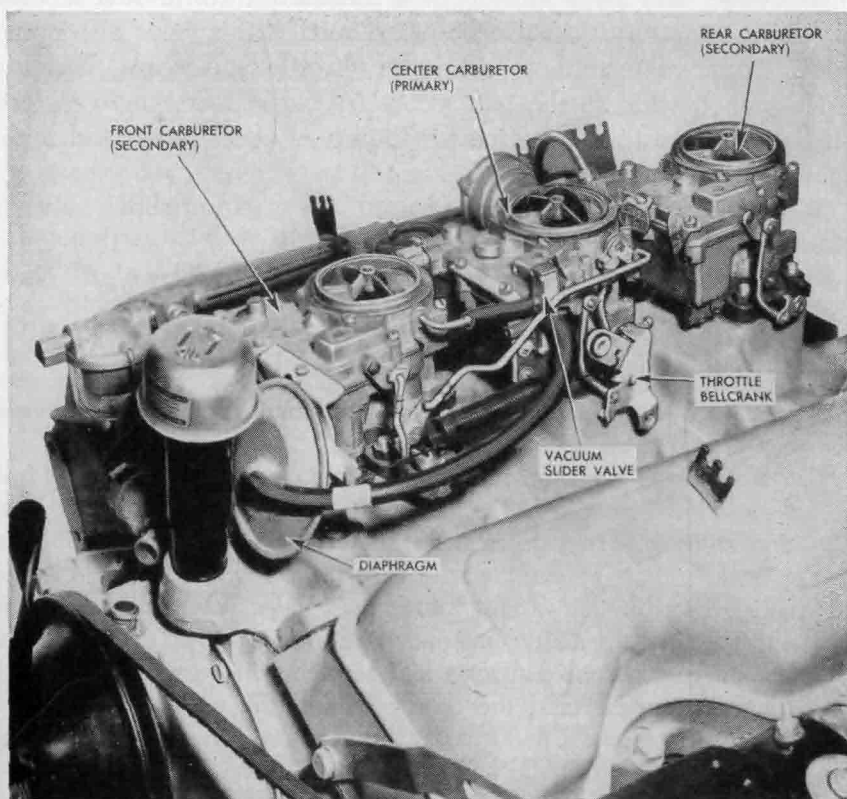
Three two-barrel carburetors mounted on a single engine. (Chevrolet Motor Division of General Motors Corporation)
